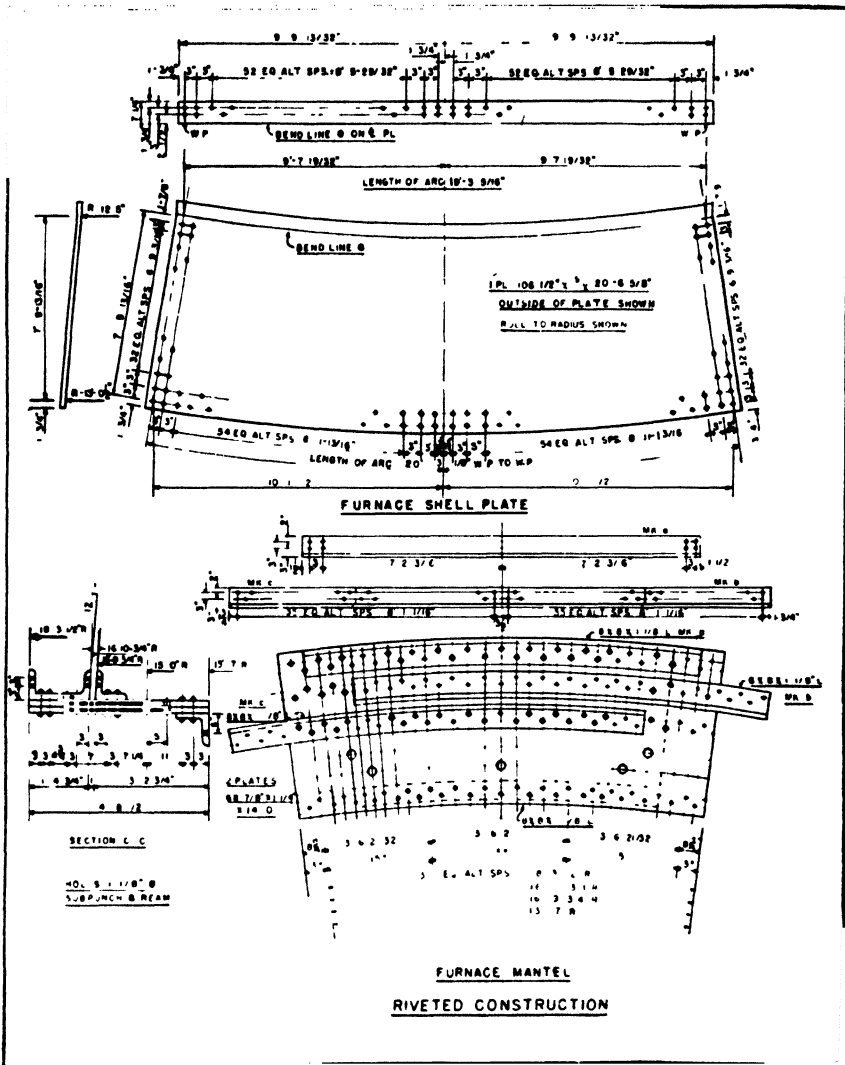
Shop detail drawing, riveted construction, furnace mantel.
